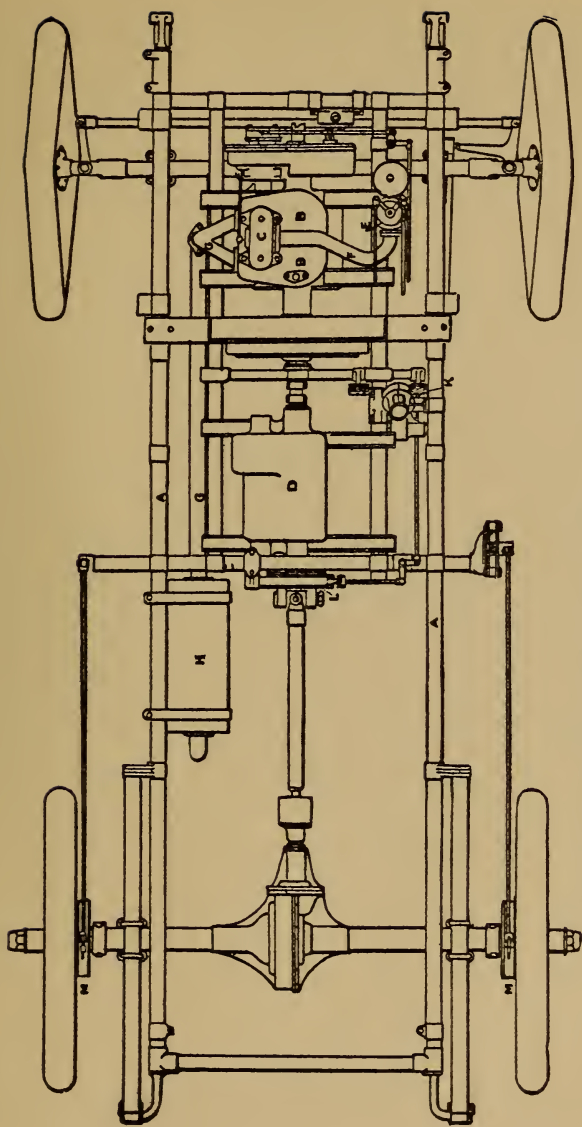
Plan of chassis of light racing car—two-cylinder motor
